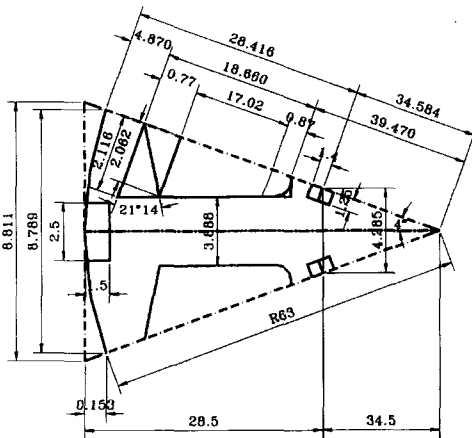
(b) Drawing of rotor slot die generated in die-layout module
